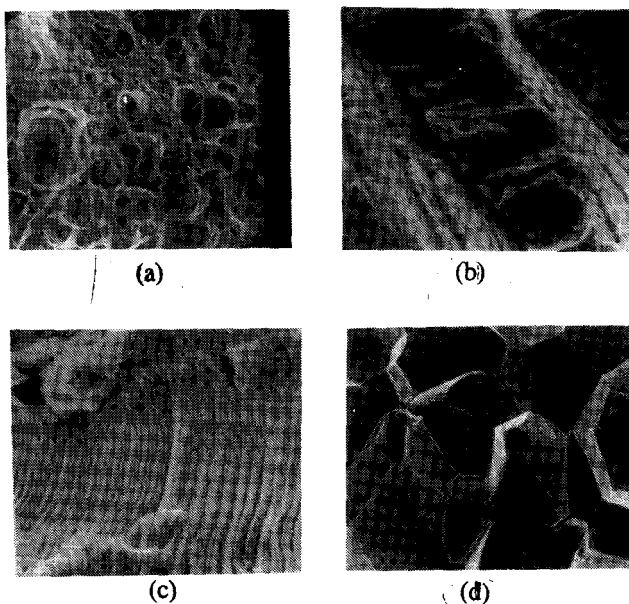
Some common fractographic features seen on laboratory tested samples. (a) Dimpled rupture in ductile fracture. (b) Cleavage facets in brittle, transgranular fracture. (c) Striations in fatigue. (d) Decohesive or intergranular rupture in environment assisted fractures like Stress corrosion cracking/Hydrogen embrittlement.
